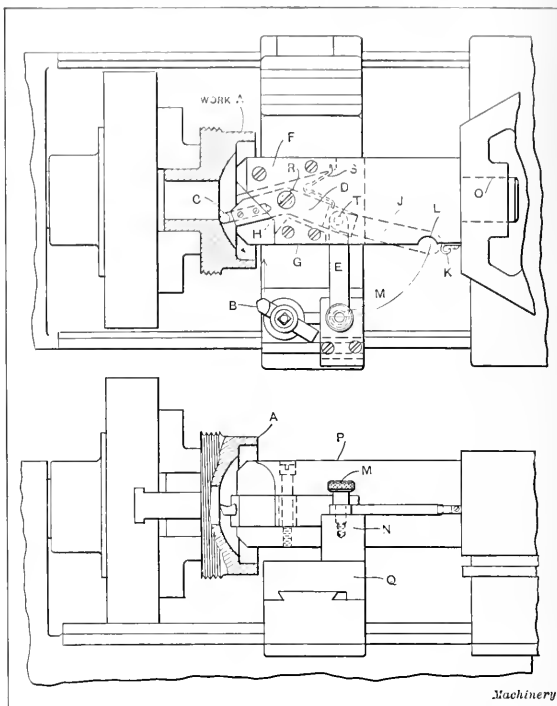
Turret Lathe Attachment for turning Concave Seat
